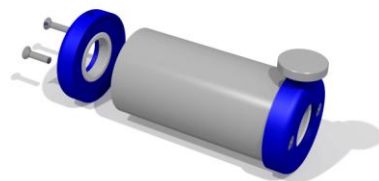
Remove the crosshead screws on the actuator, replace the outer blue rings with the new ones.
